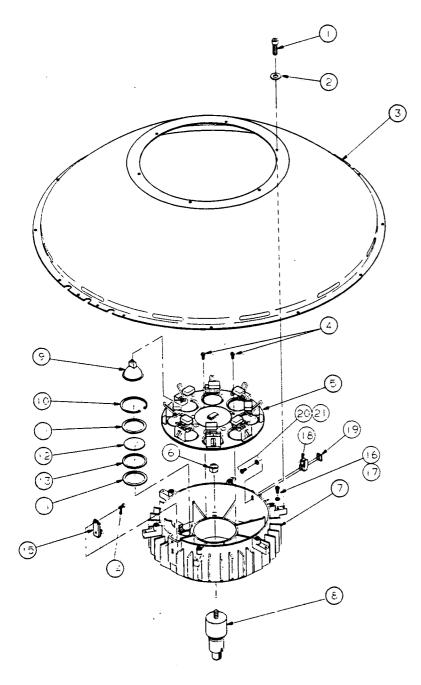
LIGHTHEAD ASSEMBLY (Part 2 of 2).
